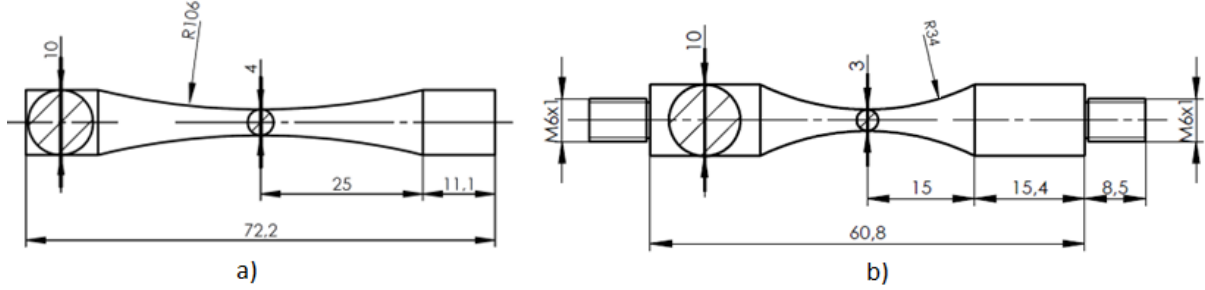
Technical drawings of the developed specimens, dimensions in mm. a) Steel; b) 7075 aluminium alloy.
